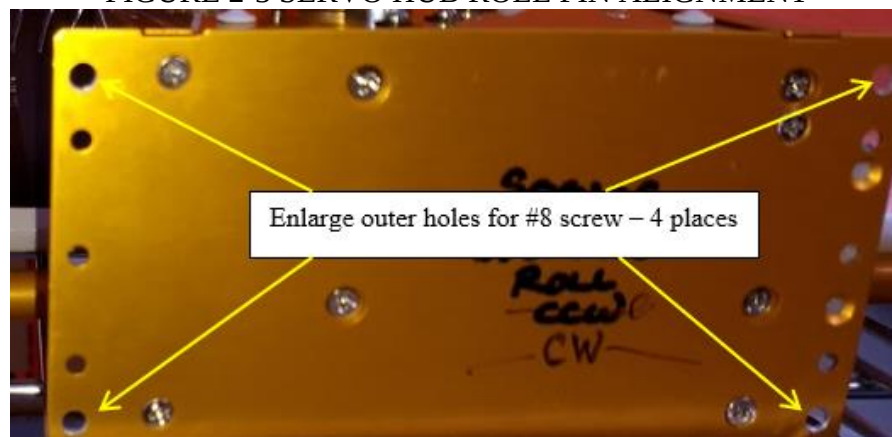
BASEPLATE HOLES TO BE ENLARGED FOR #8 SCREW
